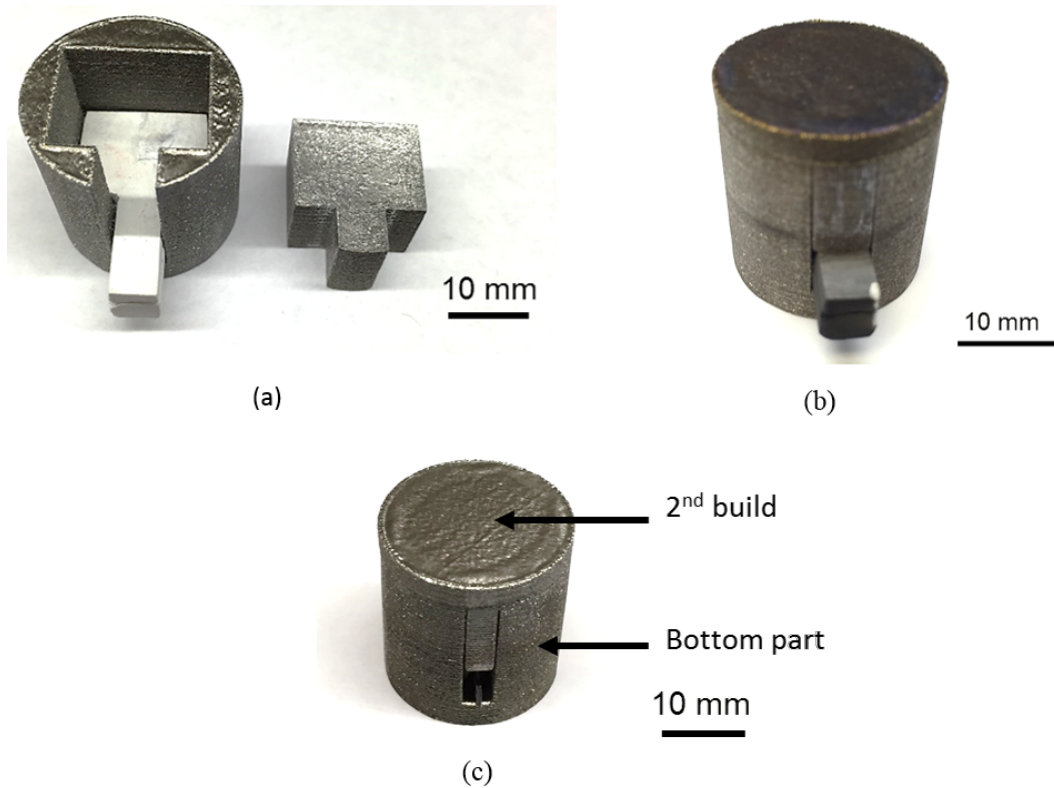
Successful building using machinable alumina and EBM (2nd design).
